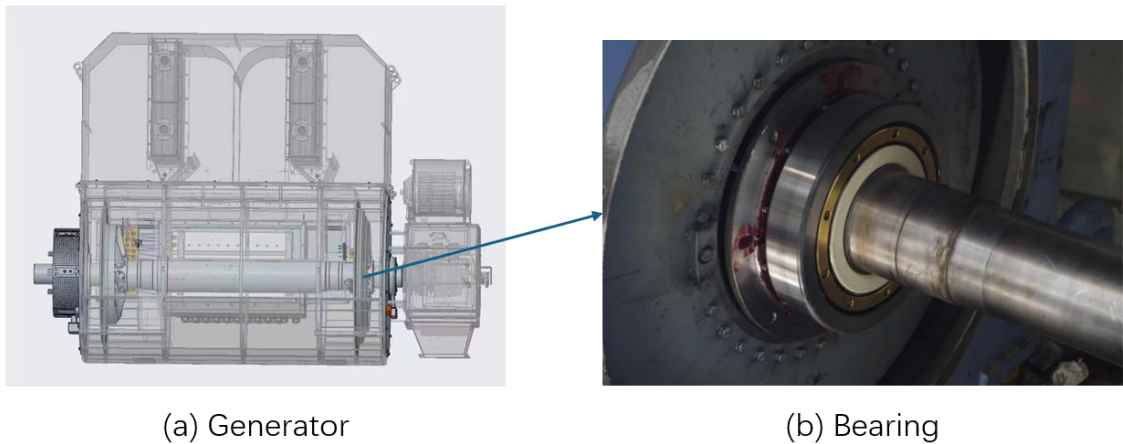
Generator bearing. (a) Generator; (b) bearing.
